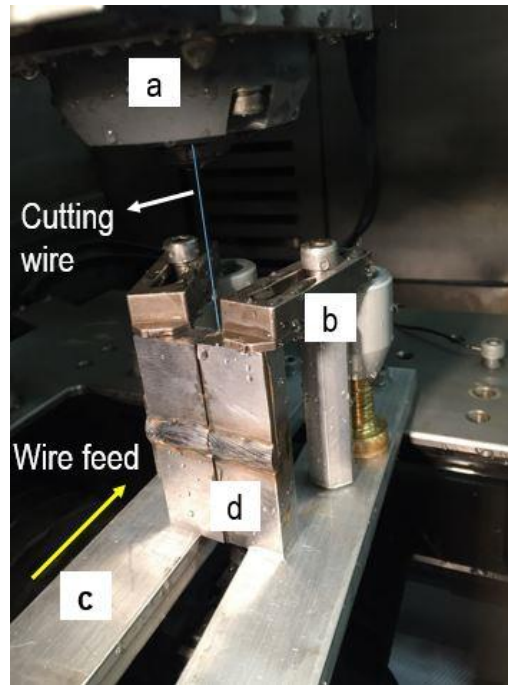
Wire EDM setup for sectioning along Z direction. (a) Wire guide, (b) Clamps, (c) Supporting beam, and (d) Welded workpieces
